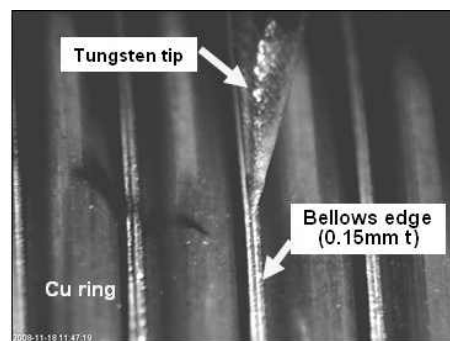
Stereoscopic view of bellow weld joint
